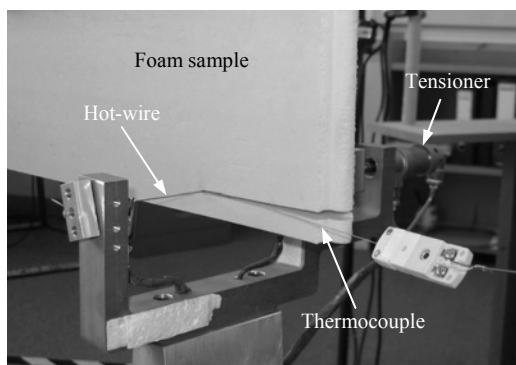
Test apparatus with thermocouple measuring active hot-wire cutting temperature
